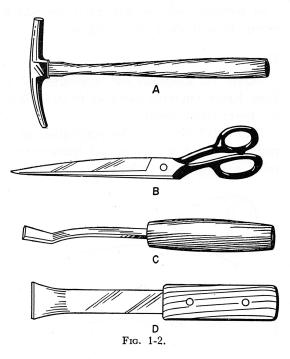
illustrates the upholstery tools necessary for removal and replacement of upholstery: A, tack hammer; B, shears; C, ripping tool; D, headlining tool.
